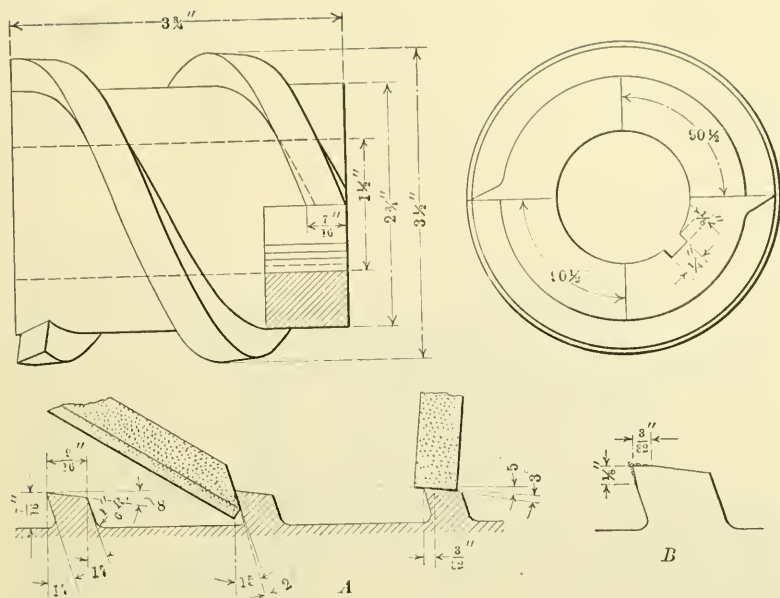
DETAILS OF NEW TYPE OF HELICAL CUTTER
